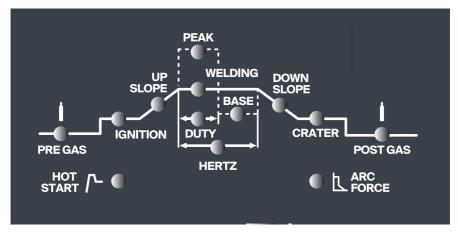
Weldarc 200 DC Welding Parameters
